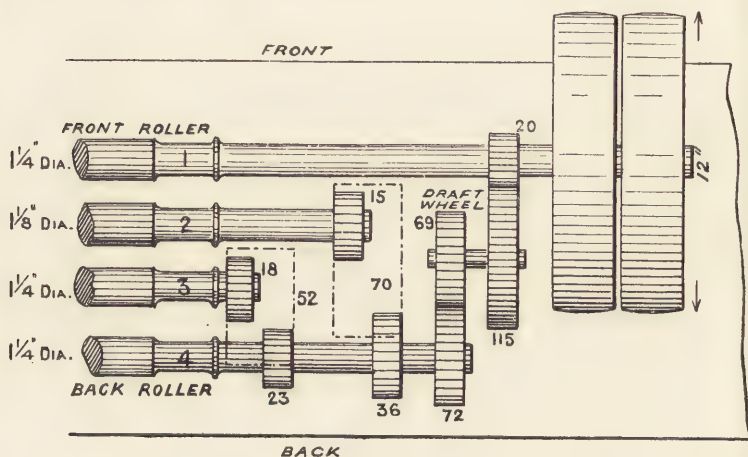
VIEW SHOWING DRIVING OF FRONT ROLLER OF DRAWING FRAME.
